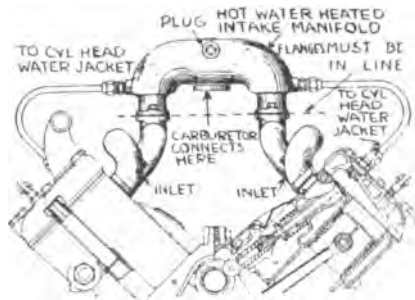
A.—Hot water heating of mixture as employed on the Oldsmobile 8 cylinder V type engine. Note the hot water circulates through a jacket around the inlet manifold. This principle is more effective than heat around the carburetor. Exhaust heat can be passed through this jacket instead of hot water, which will heat the mixture quicker. (see also pages 82, 155 and 158.)
